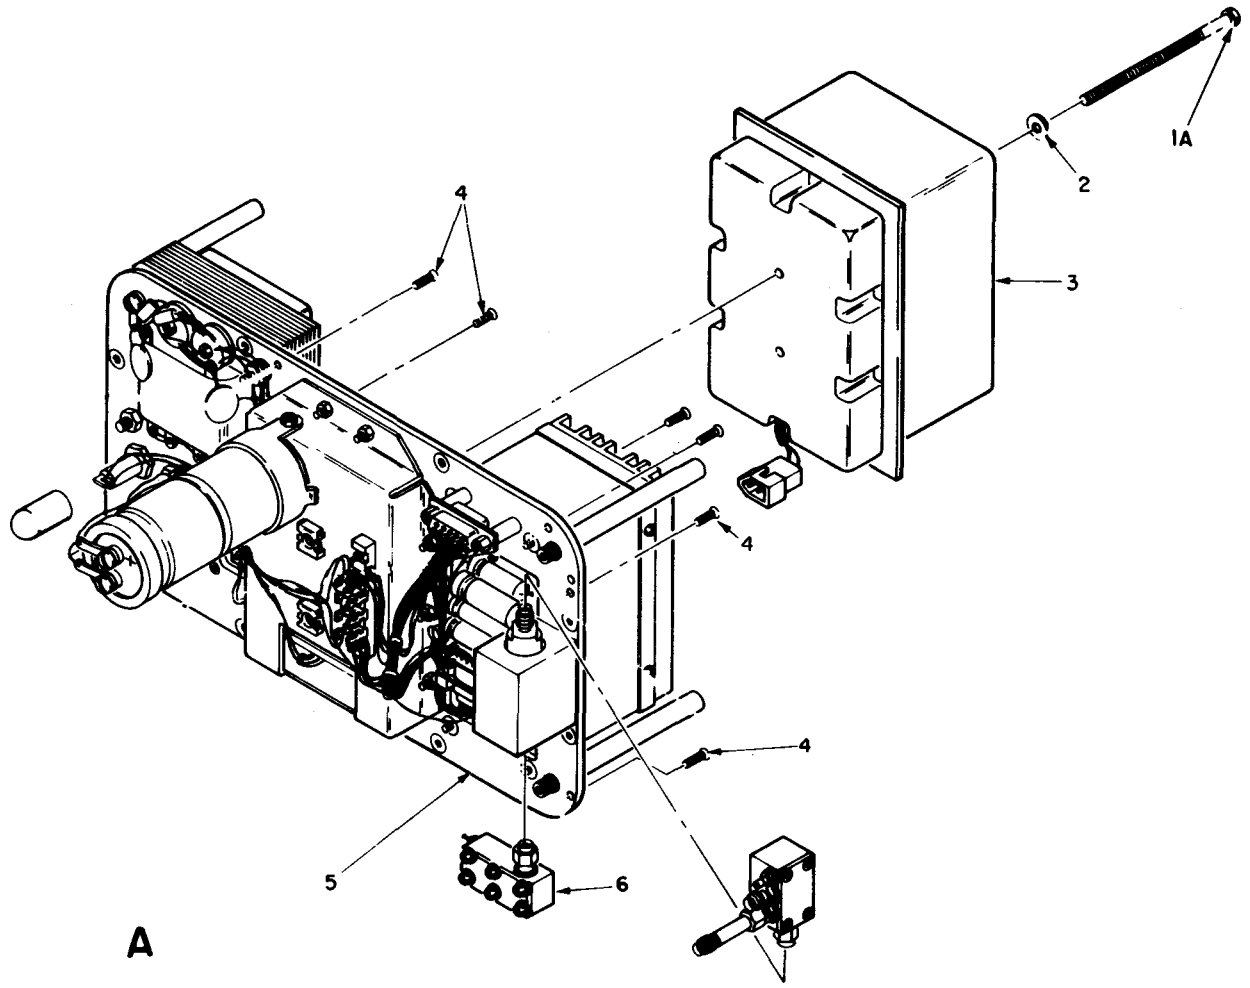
Mechanical Assembly Composite A1 (Sheet 1 of 8).
